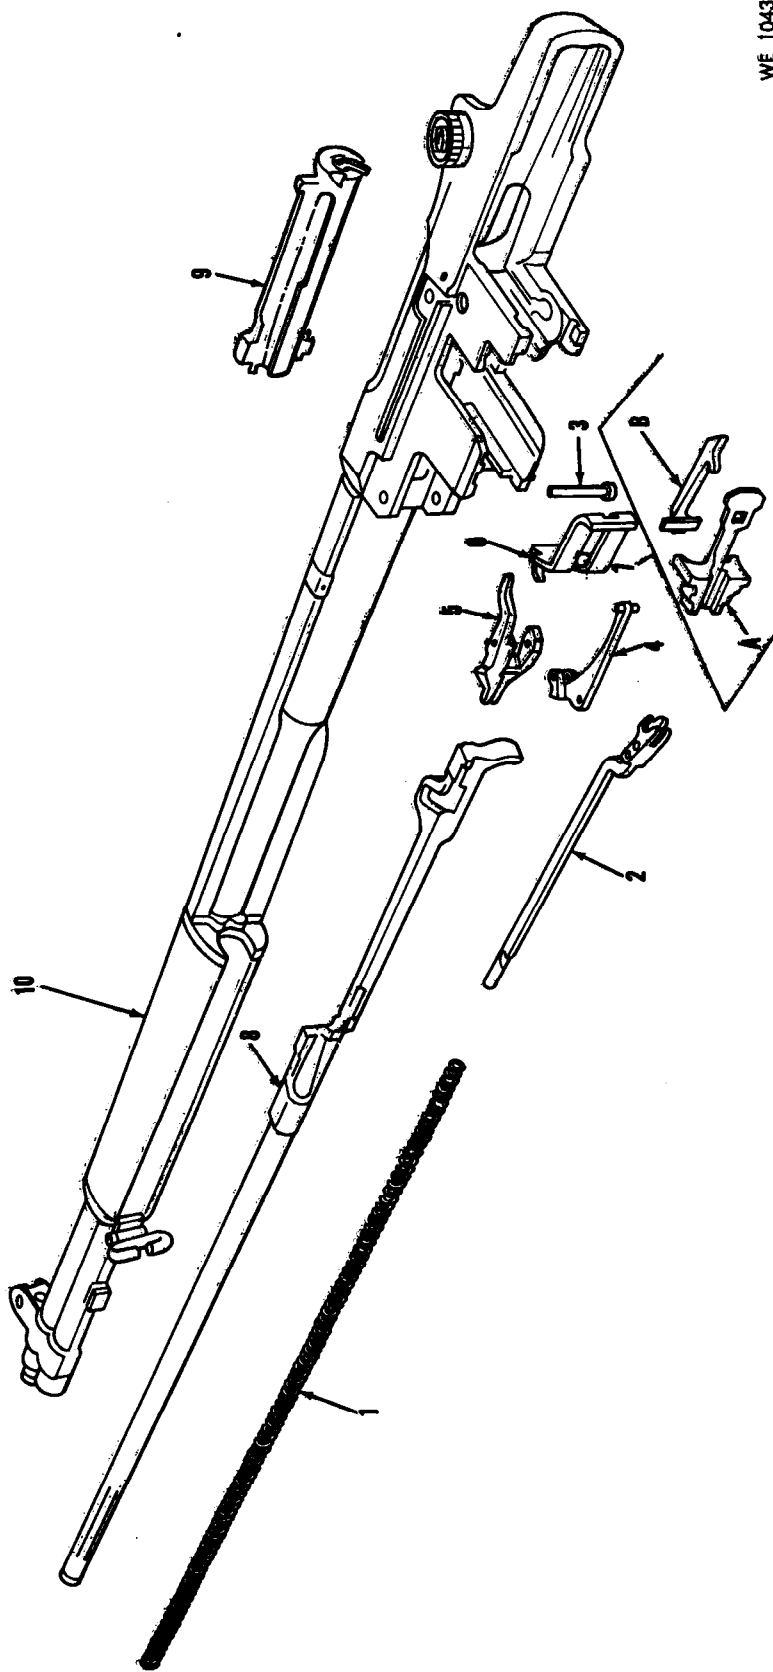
Stock assembly and gun hand guard group - exploded view.
